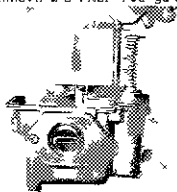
Removing Lifter Rod & Pump Plunger V4361
